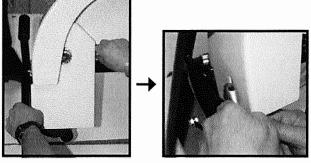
Bolt guards to frame. Note placement of drive gear for clearance from guard. Tighten as shown.
